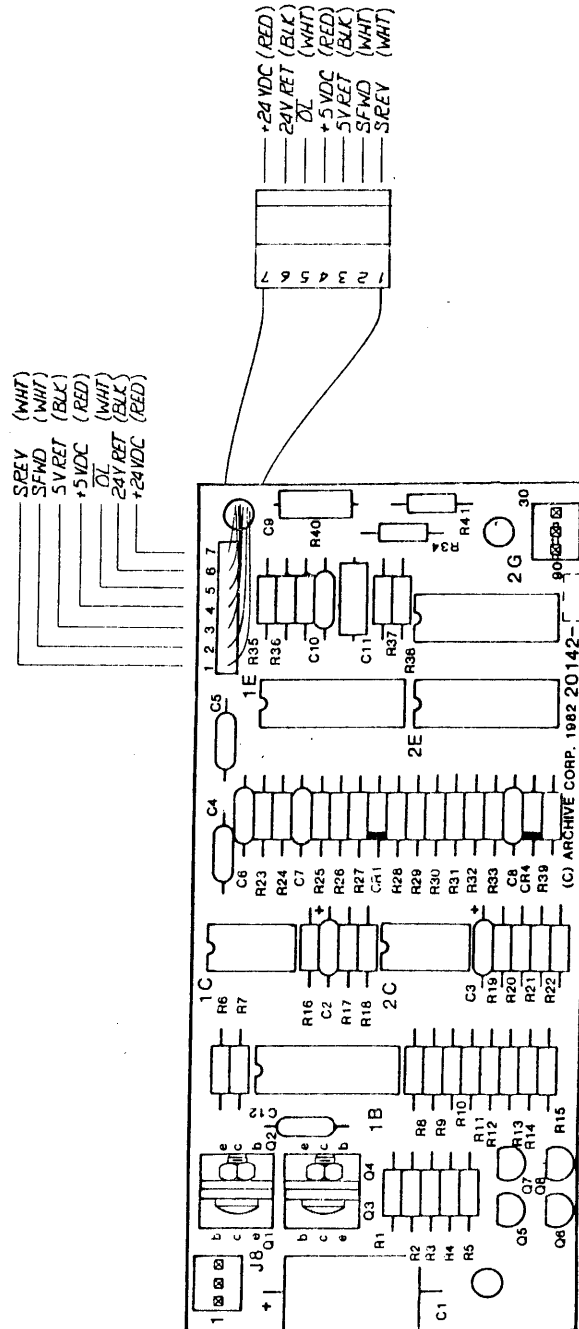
Assembly Motor PWB Parts Location Diagram
